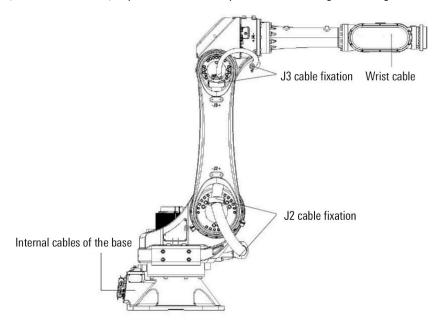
AIR50-2260/AIR80-2260 manipulator cable layout diagram
